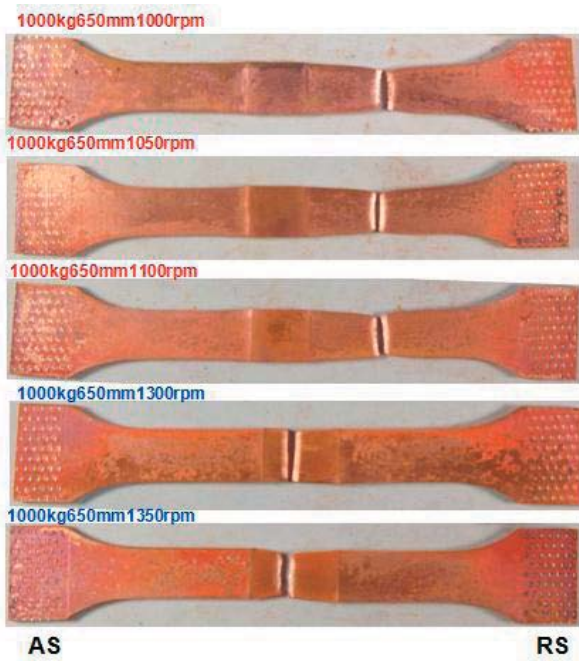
The appearance of the fractured tensile specimen welded at different rotation speeds (AS: advancing side; RS: retreating side)
